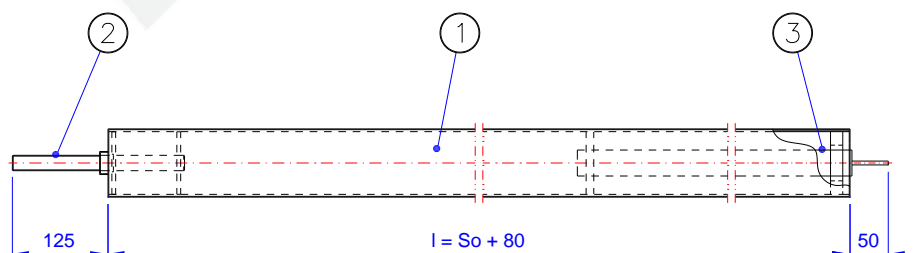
MARC-Ok(st)60-01.02.00 [Winding shaft]
